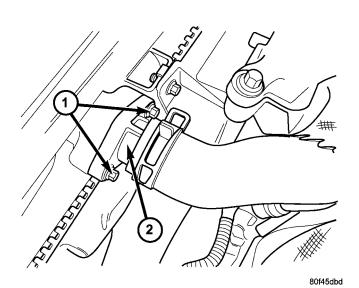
Radiator Inlet Neck - 2.4L Turbo
